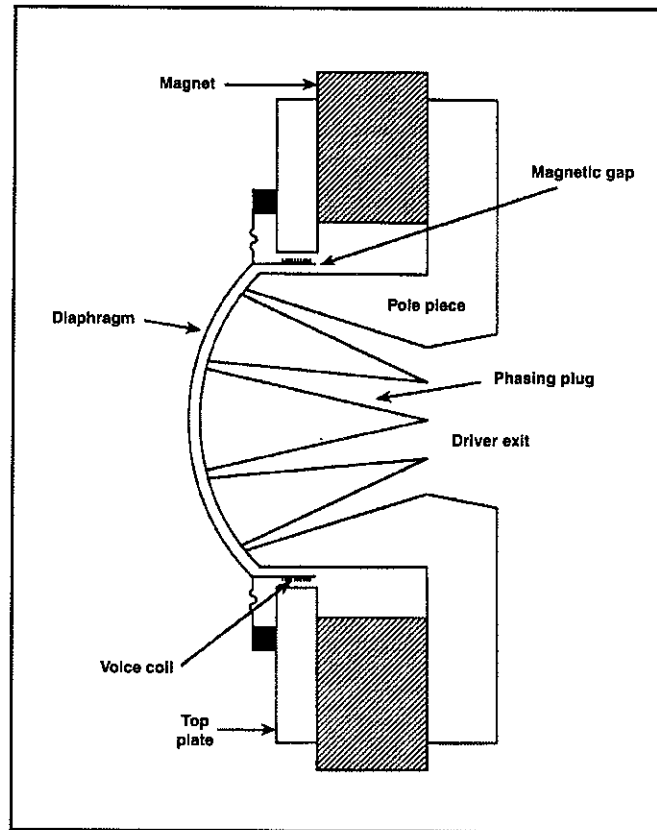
Sectional drawing of a typical compression driver showing details of the major component parts. Drawing courtesy of JBL, Inc.
